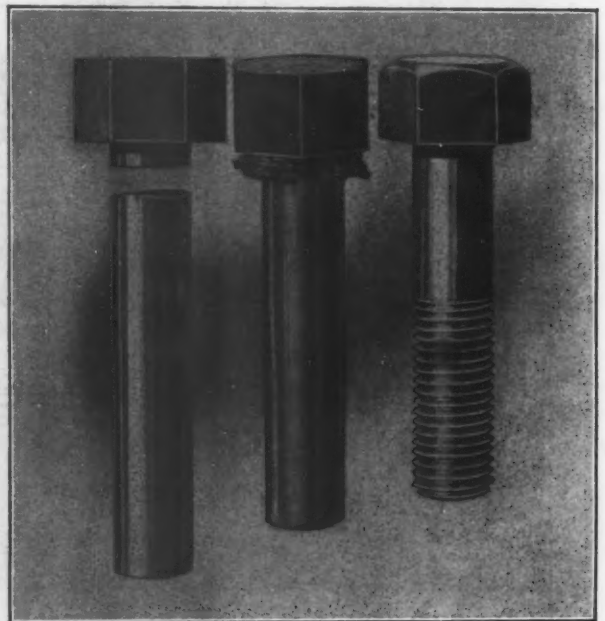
Stages in the Making of a Cap Screw with a Welded Head.
